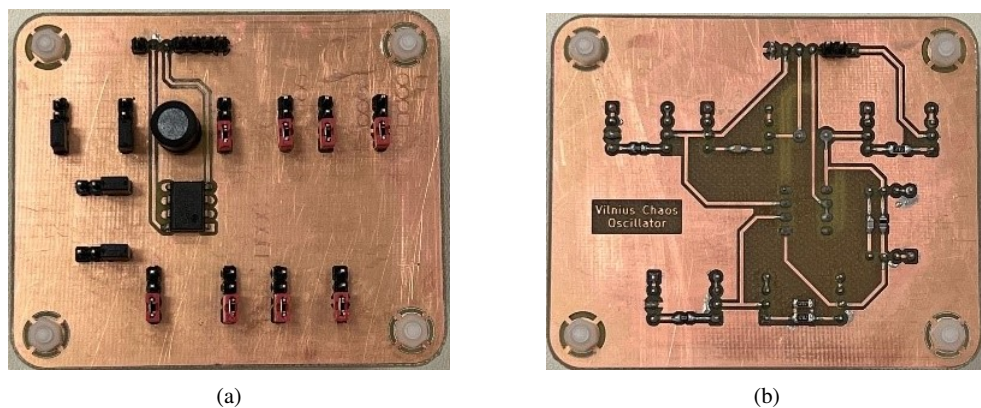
Fabricated Vilnius Chaotic Oscillator PCB Prototype: (a) Top and (b) Bottom.
